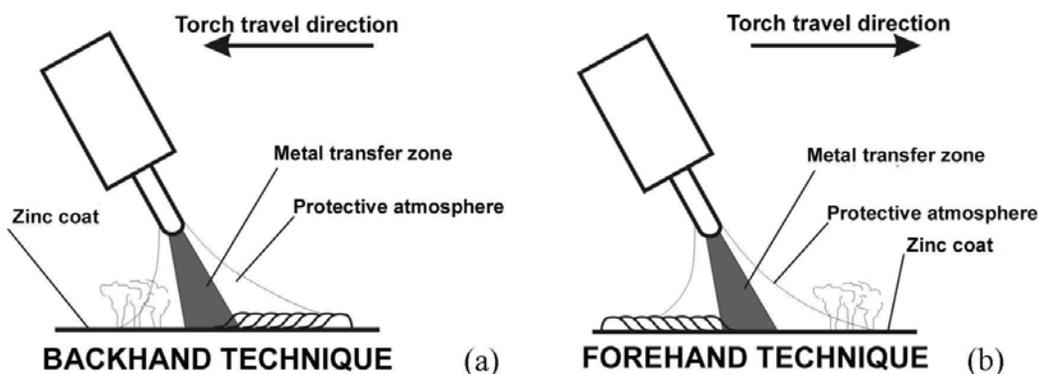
Schematic illustration of zinc coated plate welding in different torch travel directions: a) backhand technique, b) forehand technique.
